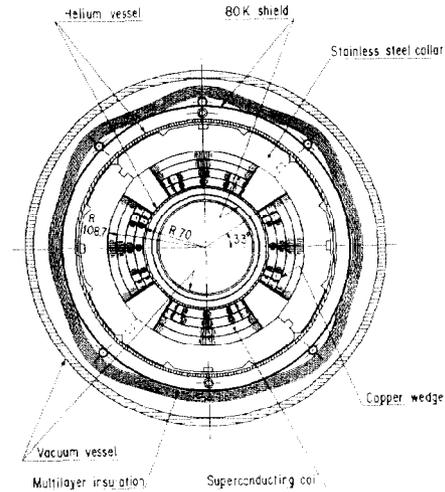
Cross-section of the superconducting quadrupole magnet assembled in a horizontal cryostat.
